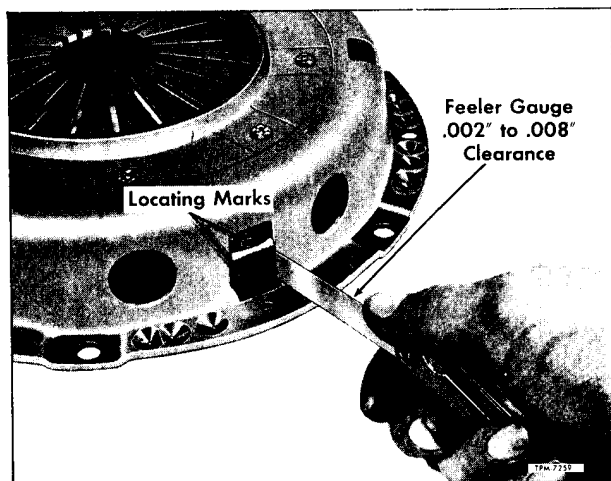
Clutch Cover-to-Plate Alignment Marks and Driving Lug Clearance Check
